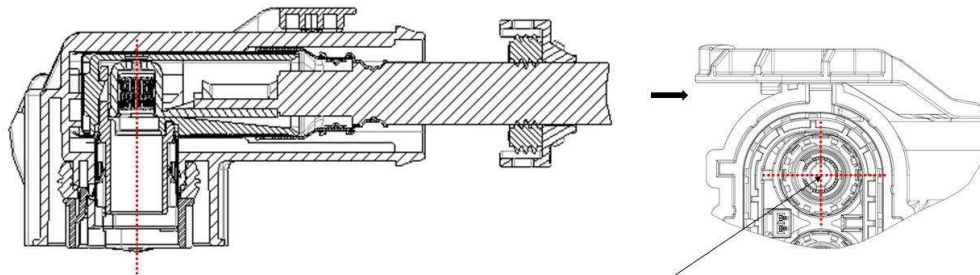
ORIENTED CABLE ASSEMBLY TO HOUSING
